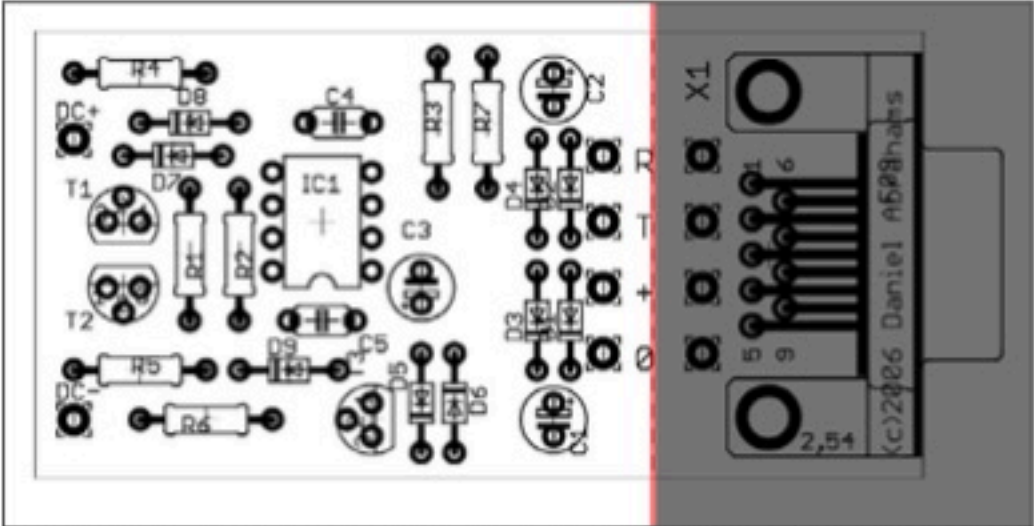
If you don't want to mount the SUBD-9 connector directly to the board, Cut the board on the red line as shown in the picture above
